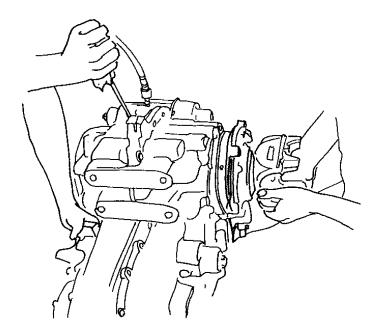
Rotate Output Shaft Yoke and Apply Pressure with Screwdriver
